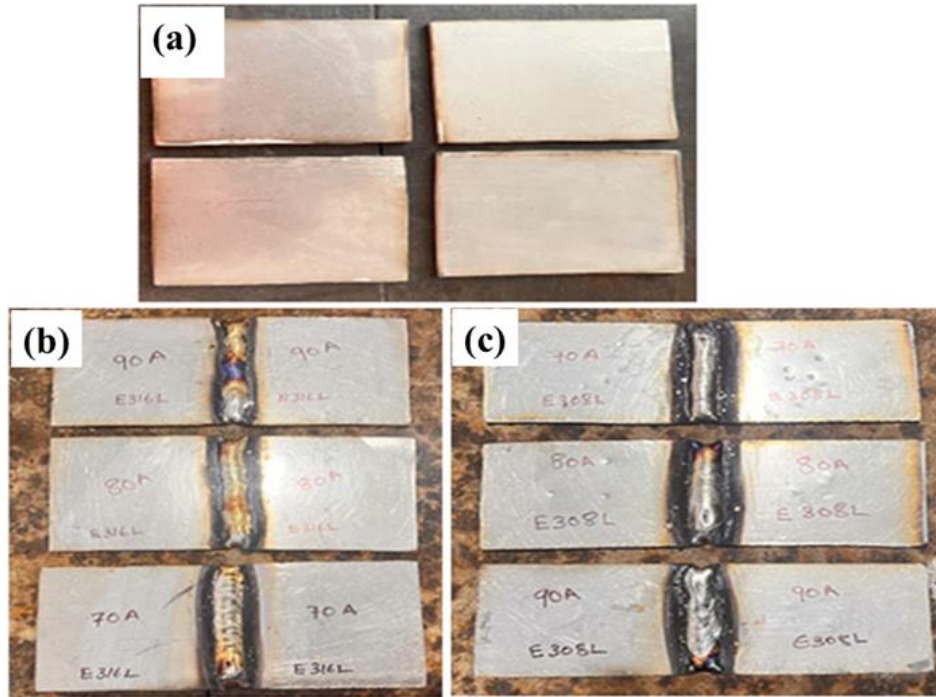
Photograph displays the preparation of samples (a) before welding after the welded samples using an applied current of 70 A, 80 A, and 90 and electrode of (b) E316L-16 and (c) E308L-16.
